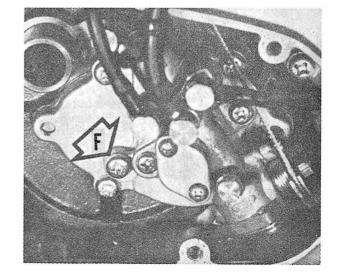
On early models, oil pump drive gears must be lubricated. Refer to text.
